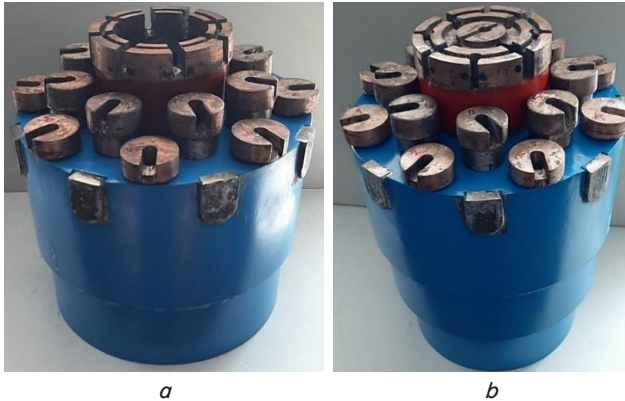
Multi-stage, universal diamond drill head with a diameter of 215.9 mm designed for: *a* – core selection; *b* – drilling wells with continuous bottom
